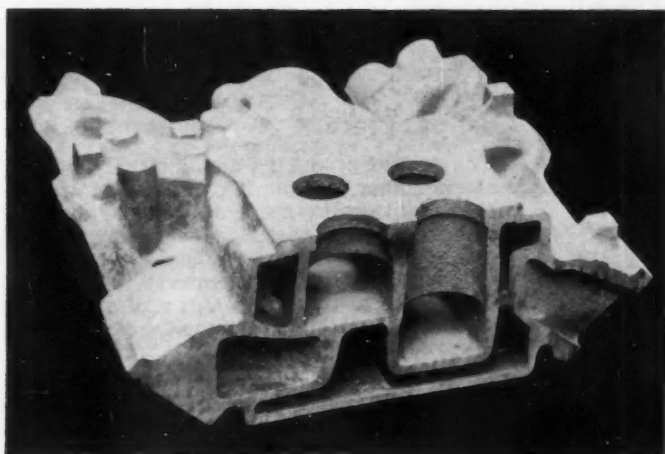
Cross-section through aluminum intake manifold for V-8 engine with 4-barrel carburetor.
